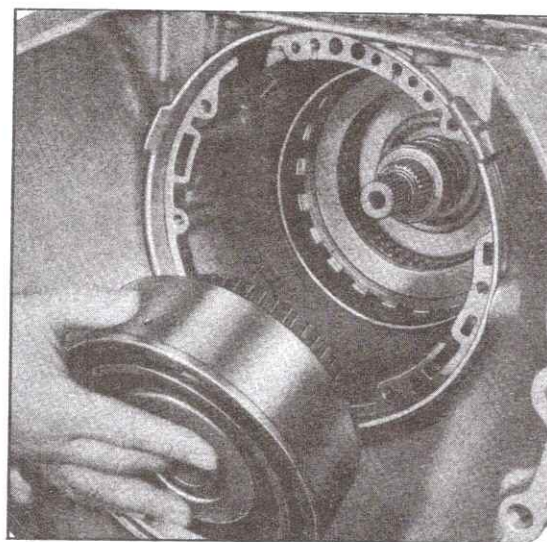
Removing Direct Clutch and Intermediate Sprag Assembly
